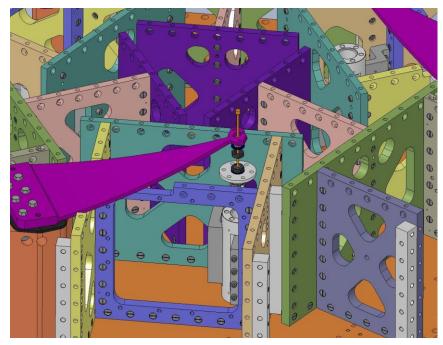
Pass the Flexure through the slot at the end of the Spring. Hold it in place during the next few steps.
